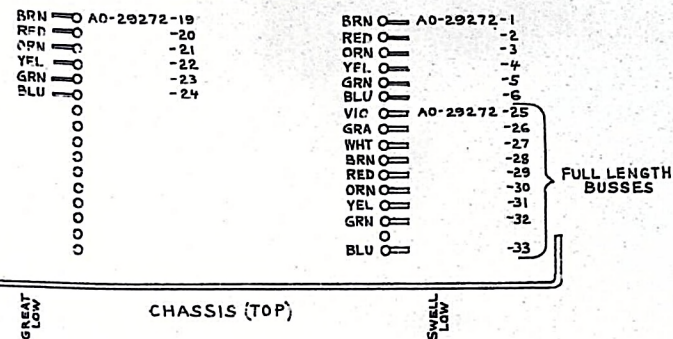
Harp and Chimes Keyer Assembly Wiring Diagram
